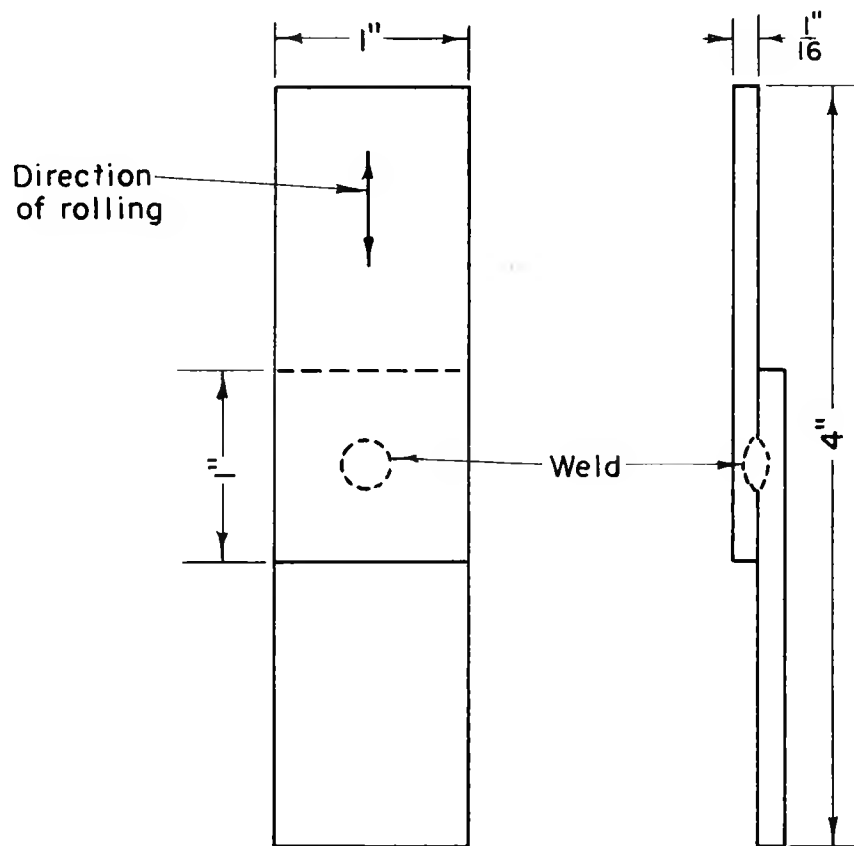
TENSION-SHEAR TEST SPECIMEN
